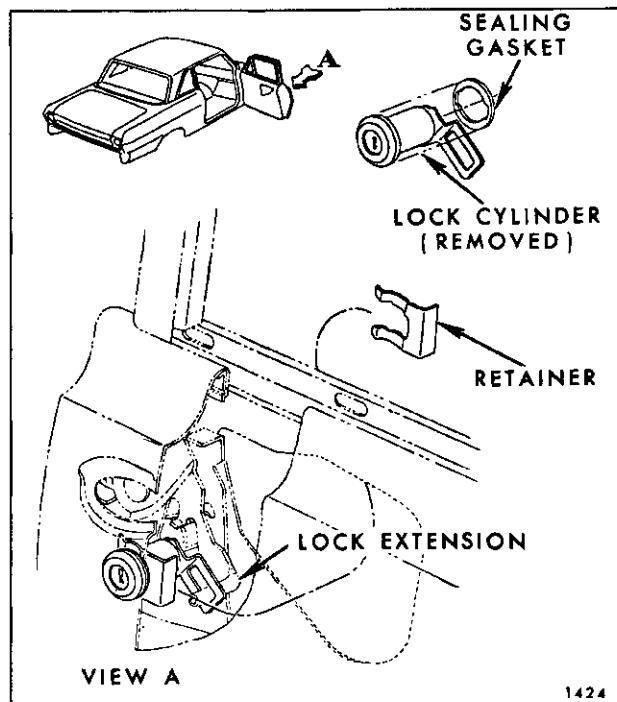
Front Door Lock Cylinder Removal - All Styles
